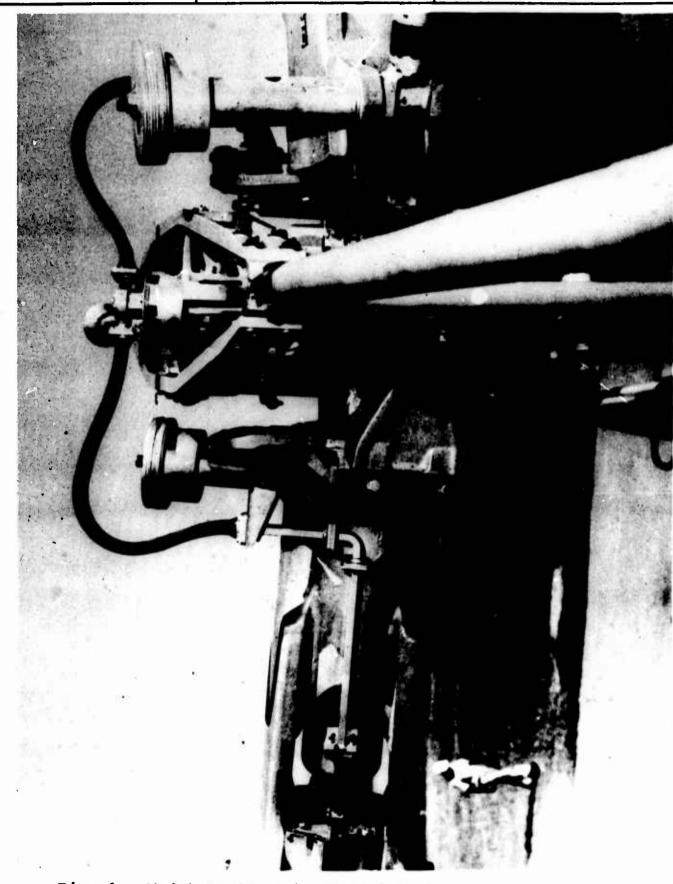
Model UH-1B, S/N AF 62-023; Main Rotor Blade Radar - Upper Mast Assembly Installation
